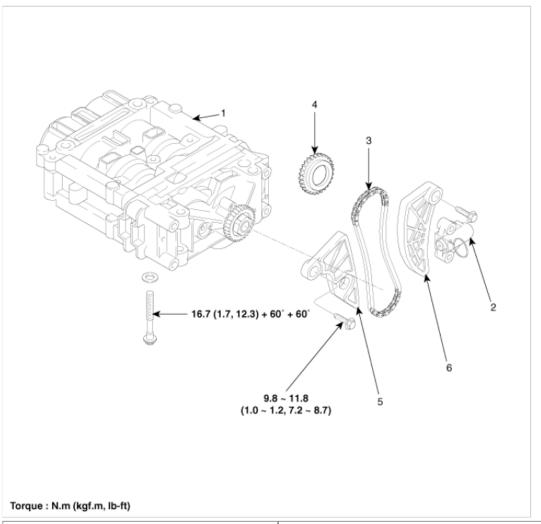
Locating Oil Pump Components With Torque Specifications (Oil Pump Type) Courtesy of KIA MOTORS AMERICA, INC.
